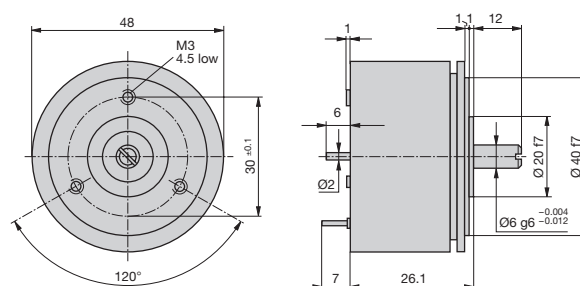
KINAX 3W2 with special drive shaft at front and at rear. At front: \varnothing 6 mm, length 12 mm. At rear: \varnothing 2 mm, length 6 mm.
